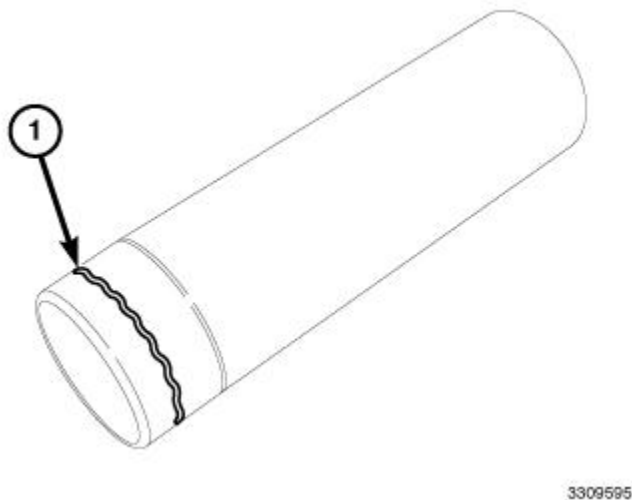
Applying Stud & Bearing Mount Bead To Spark Plug Tube
